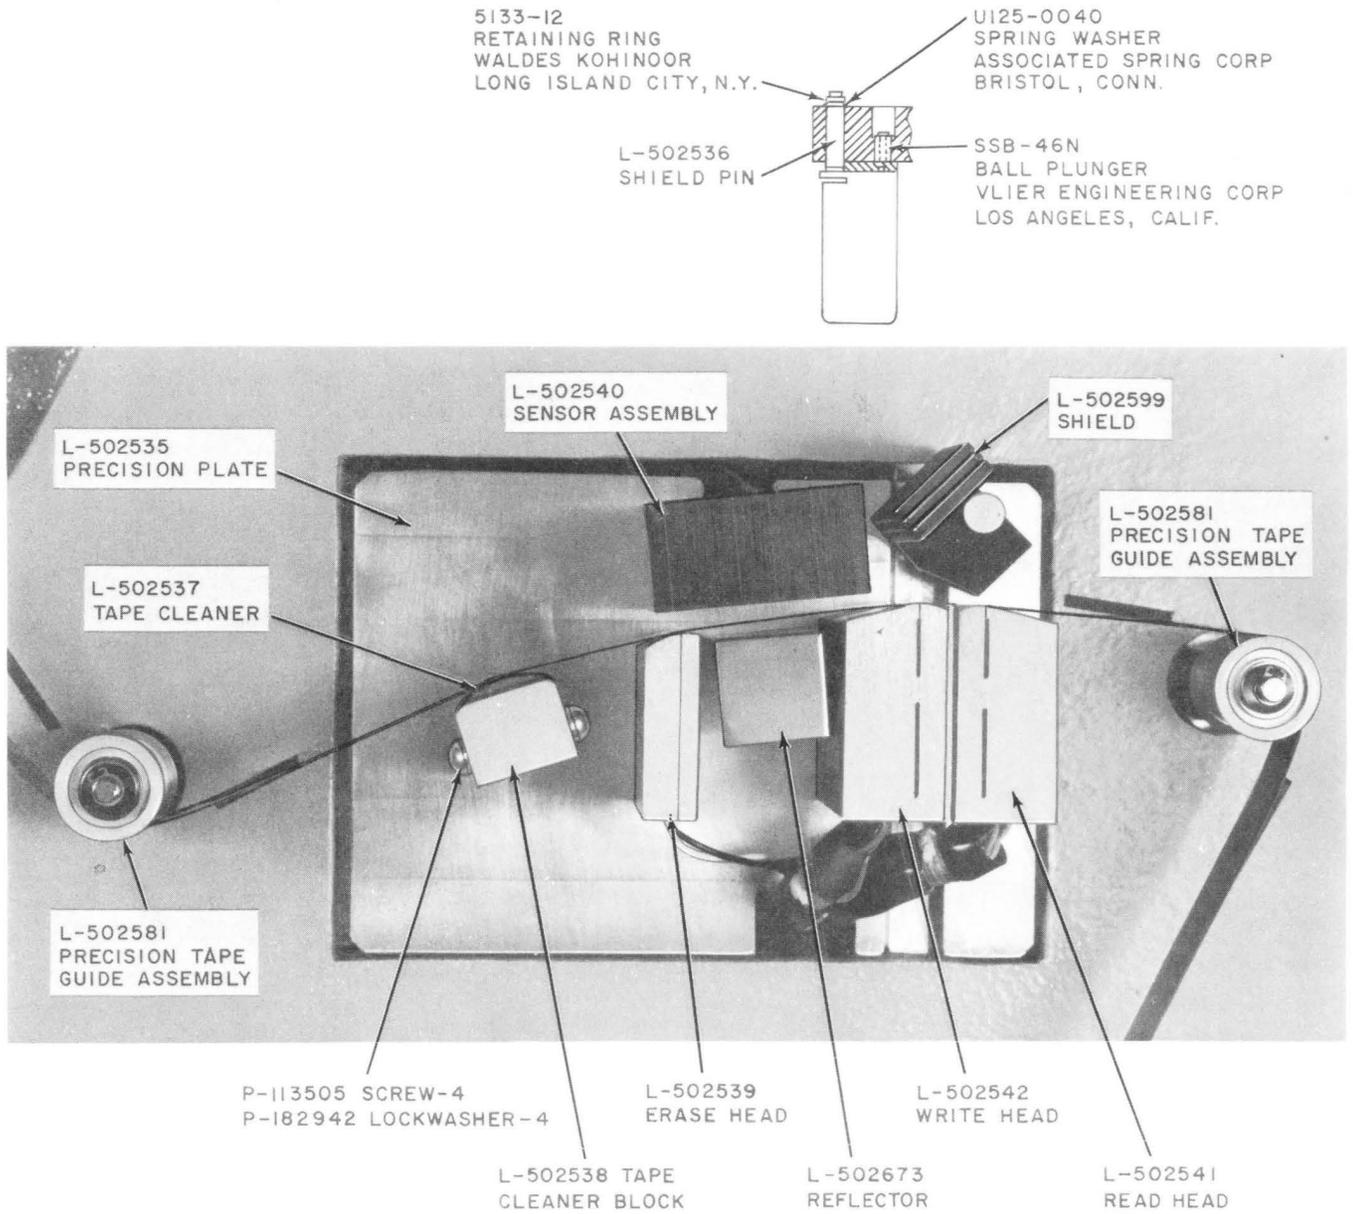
Partial Front View of KS-20571 L1 or L2 Tape Transport Showing Tape Path Components
